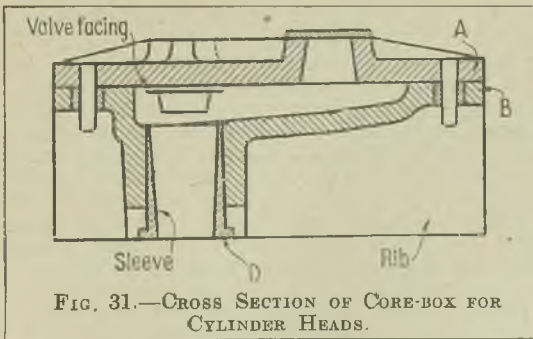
CROSS SECTION OF CORE-BOX FOR CYLINDER HEADS.
